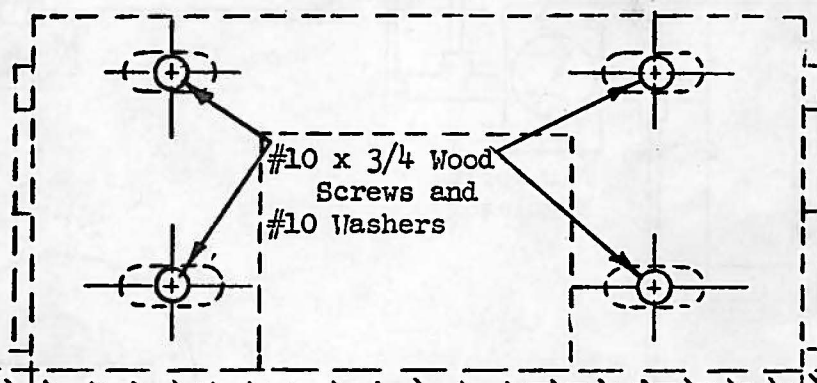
FIGURE HTABLE CUTOUT FOR 269W MACHINES
